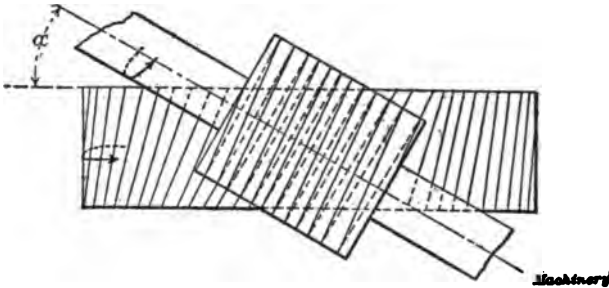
Cutting a Right-hand Spiral Gear with a Right-hand Hob
